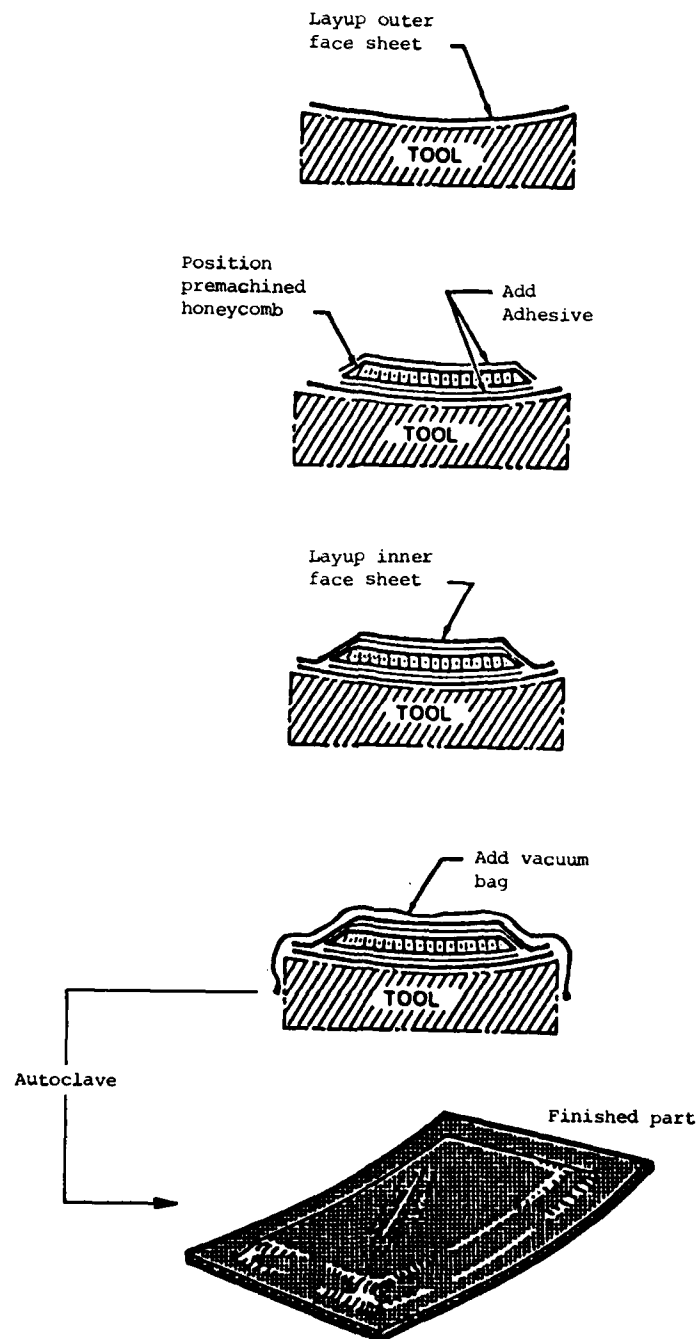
SCHEMATIC ILLUSTRATION OF THE STEPS IN MANUFACTURE OF A HONEYCOMB PANEL BY COCURING
